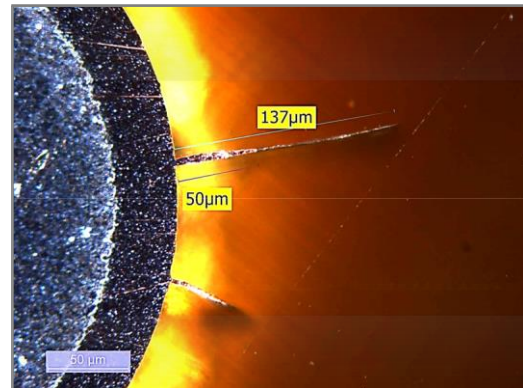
In-plane section of a via without capture pad showing cracks and copper ingress caused by drilling in brittle resin.
